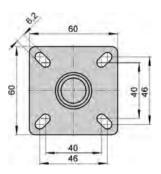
Used in bracket series:LDA:Wheel Ø 75 mmLGDA:Wheel Ø 100 mm
